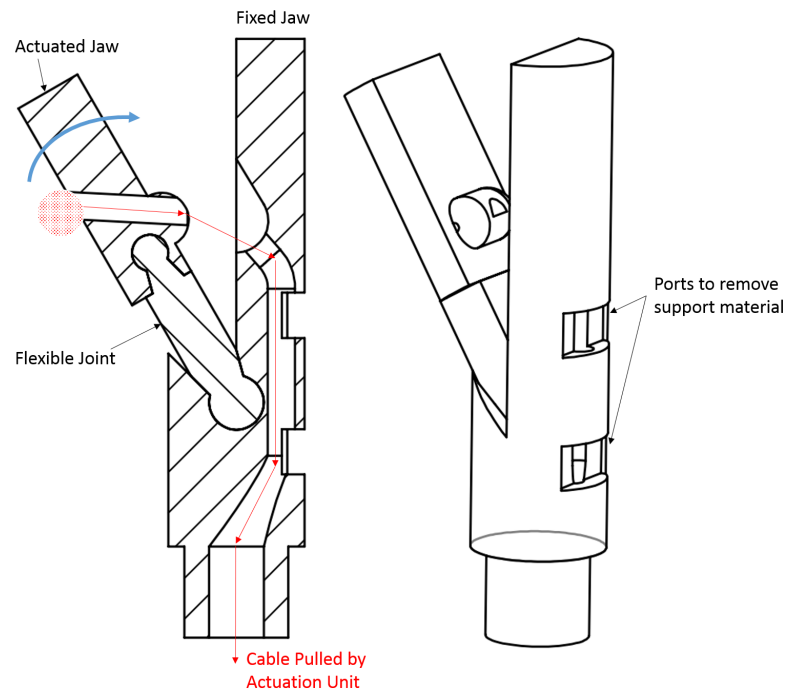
Single jaw action grasper schematic and 3D printed part.
